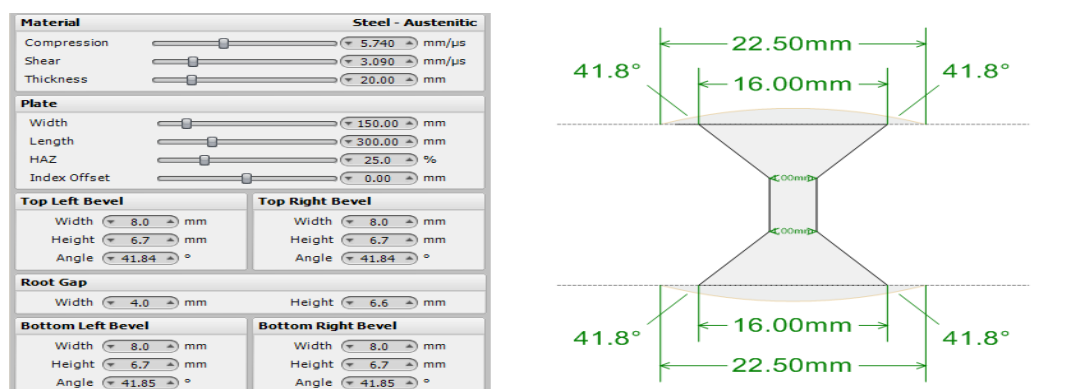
Weld bevel preparation with ES beam tool3 software
